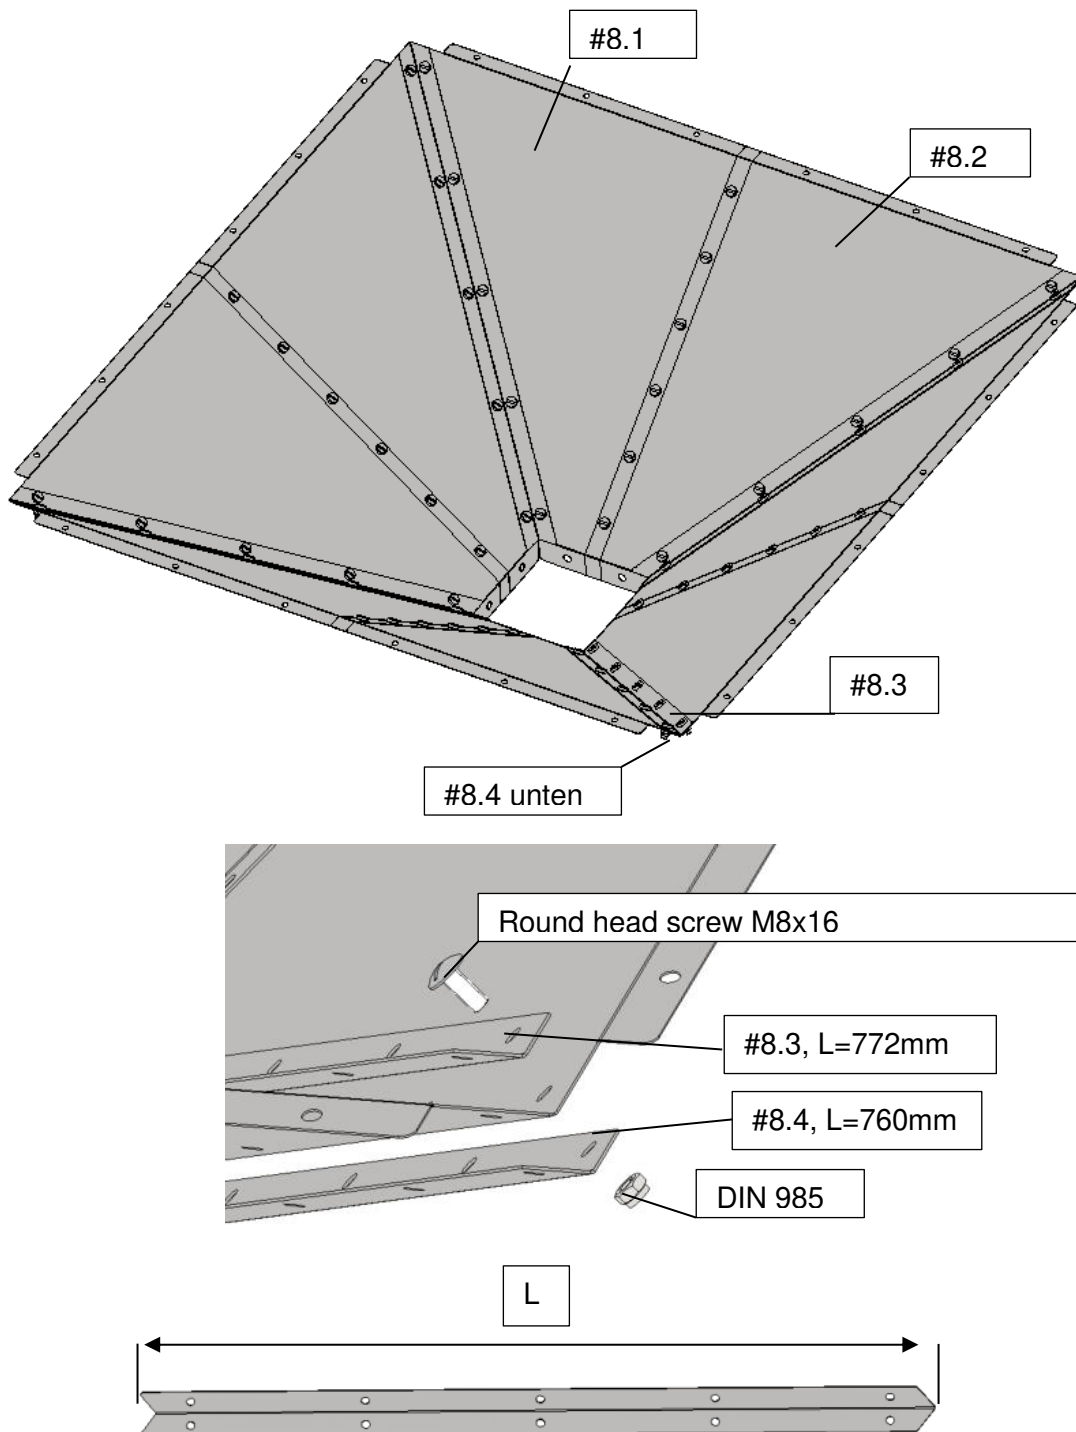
Exploded view of air box 1m³ (not all parts numbered)
